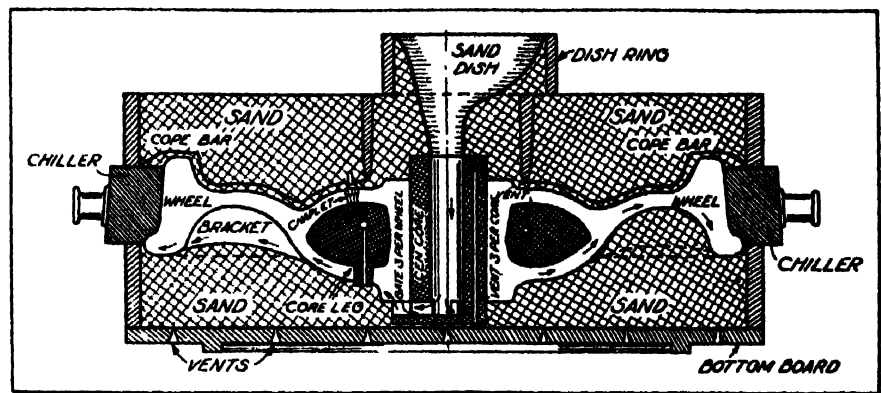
SECTION OF A WHEEL MOLD SHOWING THE RUNNER THROUGH THE CENTER CORE AND THE METHOD OF BOTTOM GATING
